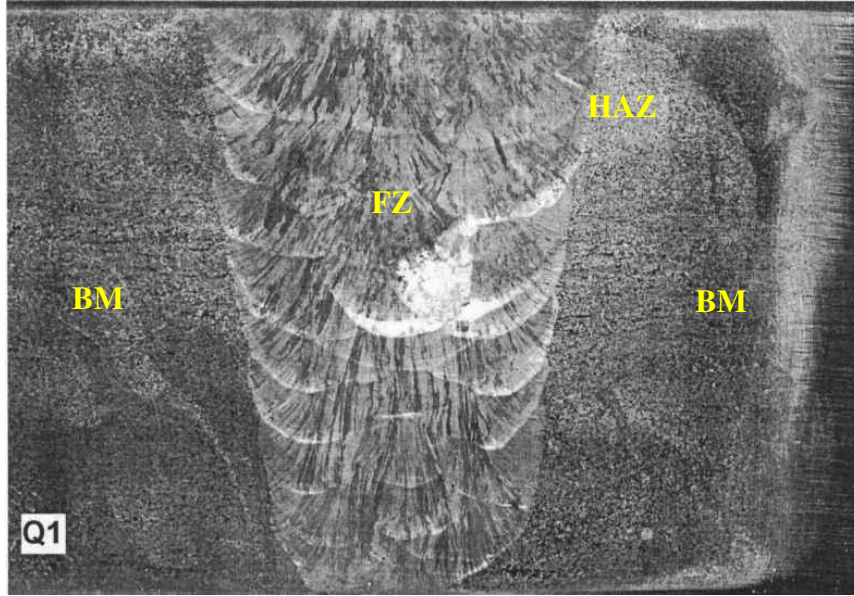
Macrograph of the Cr-Ni based austenitic weld material. Weld data: root tungsten inert gas welded, filler layers manual metal arc welded, V- butt austenitic weld thickness 32 mm. BM: Base Metal, FZ: Fusion Zone, HAZ: Heat Affected Zone.
